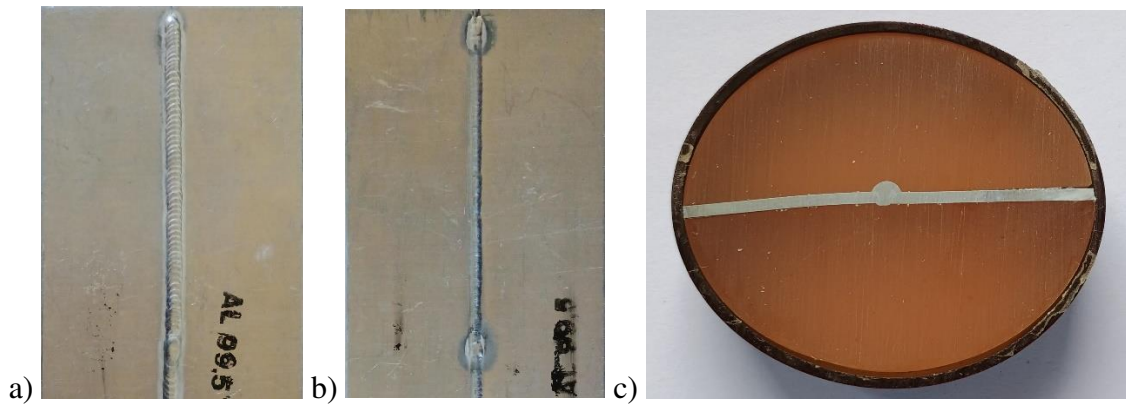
Butt joint of 1 mm thick sheets using the MIG method: a) weld face, b) weld root, c) metallographic section.
